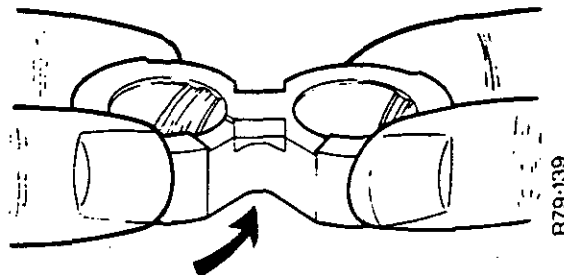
REMOVING MARKS FROM THE FACES OF THE BEARING
